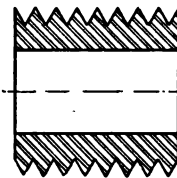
Conventional Drawing for Threads in Sectional Pieces
